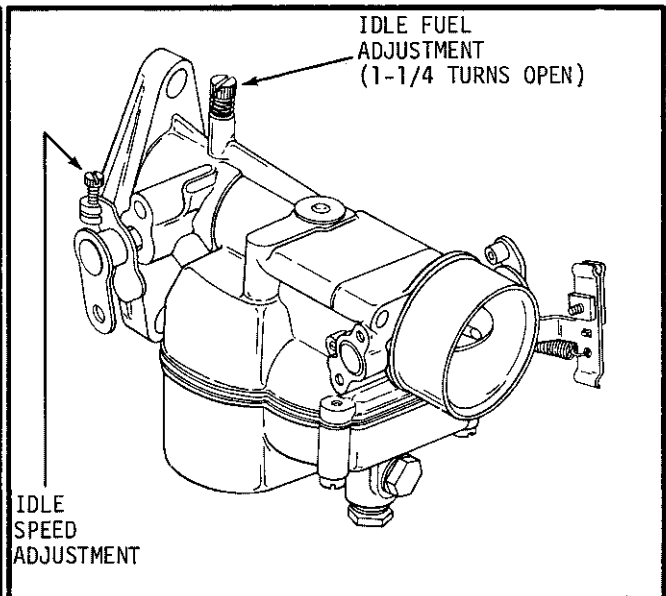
ADJUSTMENTS, FIXED MAIN JET CARBURETOR
